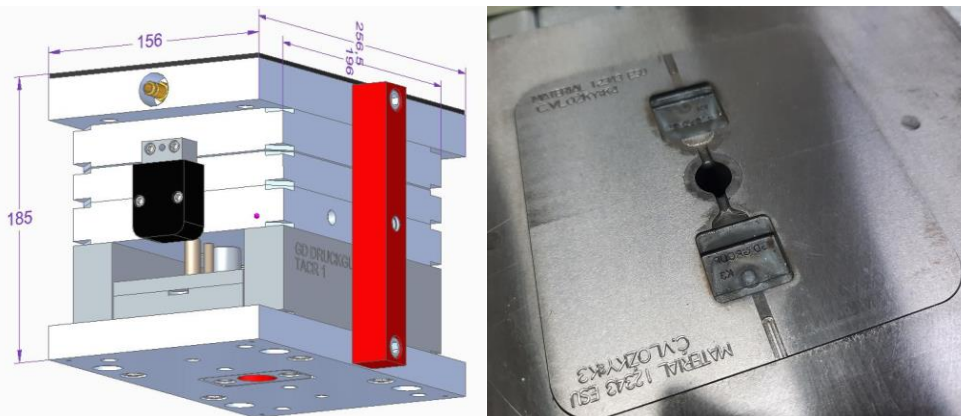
Model of mould assembly (left) and interchangeable shaped parts K3 and K4 (right)
